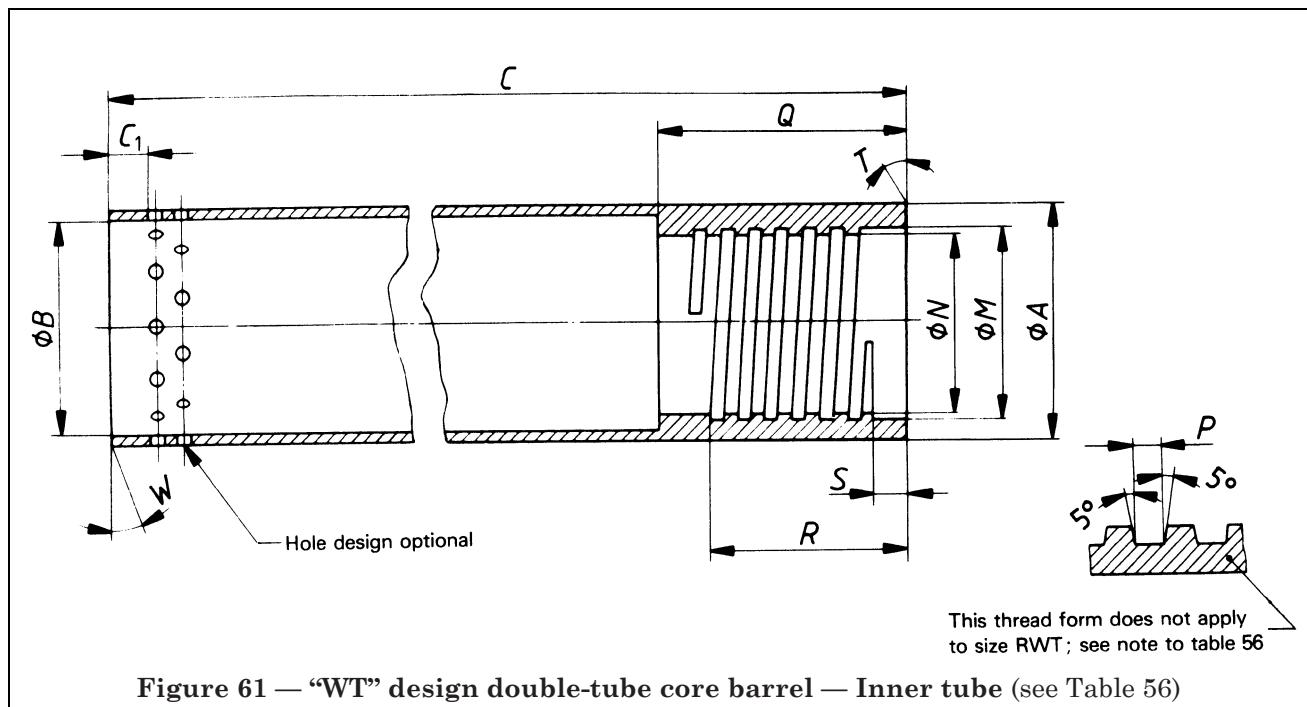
“WT” design double-tube core barrel — Inner tube (see Table 56)
